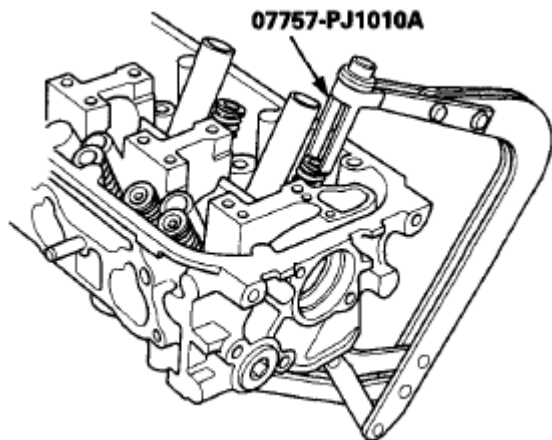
Installing Valve Spring Compressor Attachment And Valve Spring Compressor
